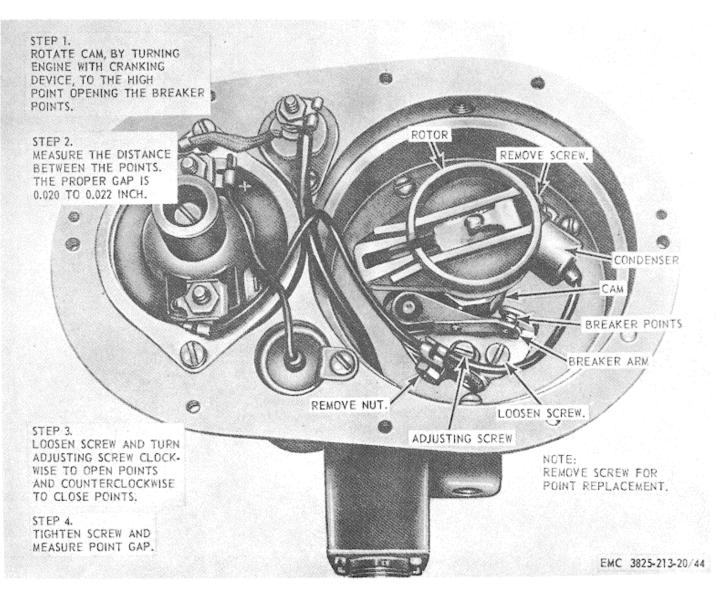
Plow and carrier engine distributor breaker point, replacement and adjustment.
